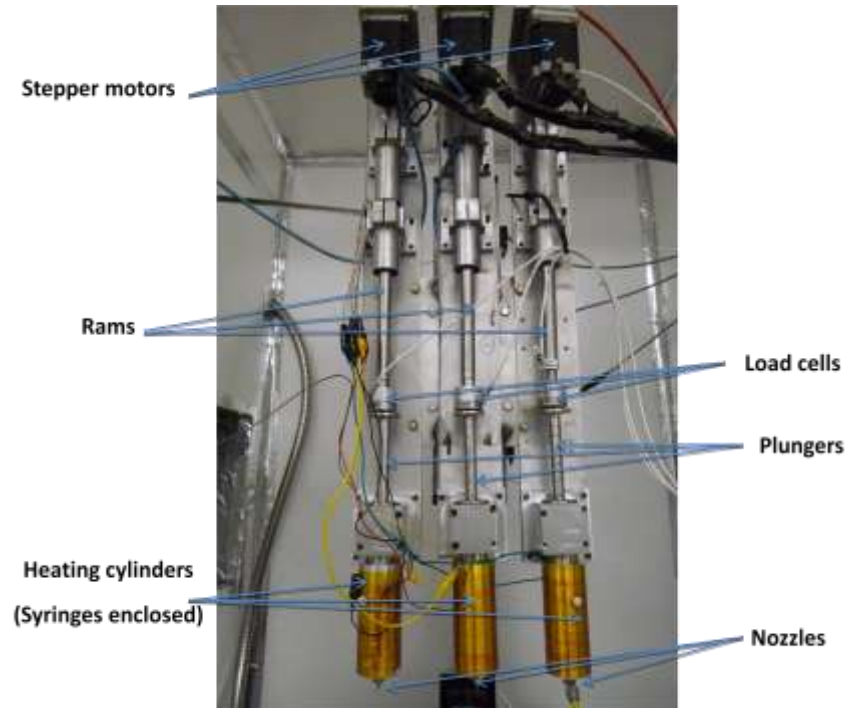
Three extrusion devices each consisting of a stepper motor, a ram, a load cell, a plunger, a syringe enclosed in a heating cylinder, and a nozzle
